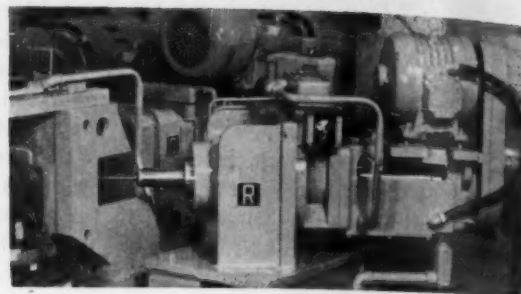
Single-spindle hydraulic driller has been developed for drilling in out-of-the way locations.
